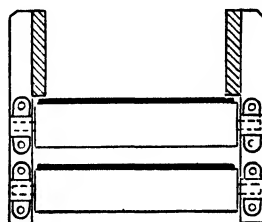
Clay Conveyor Belt Supported on Rollers, 1870
